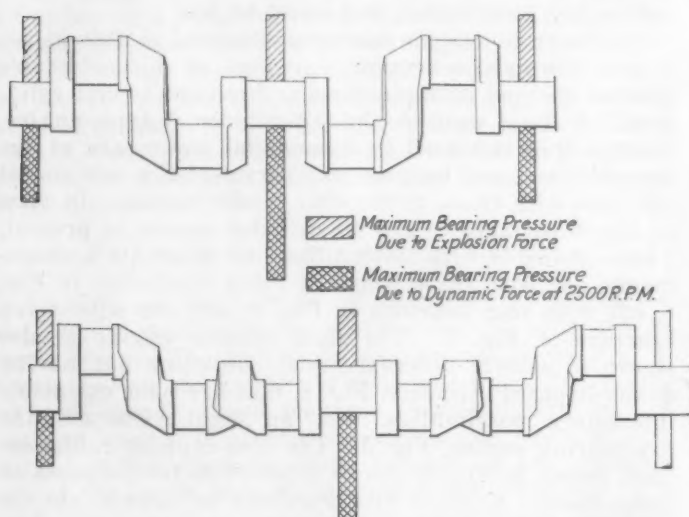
MAXIMUM BEARING-PRESSURES ON THE THREE-BEARING CRANKSHAFTS OF FOUR (ABOVE) AND (BELOW) SIX-CYLINDER ENGINES
